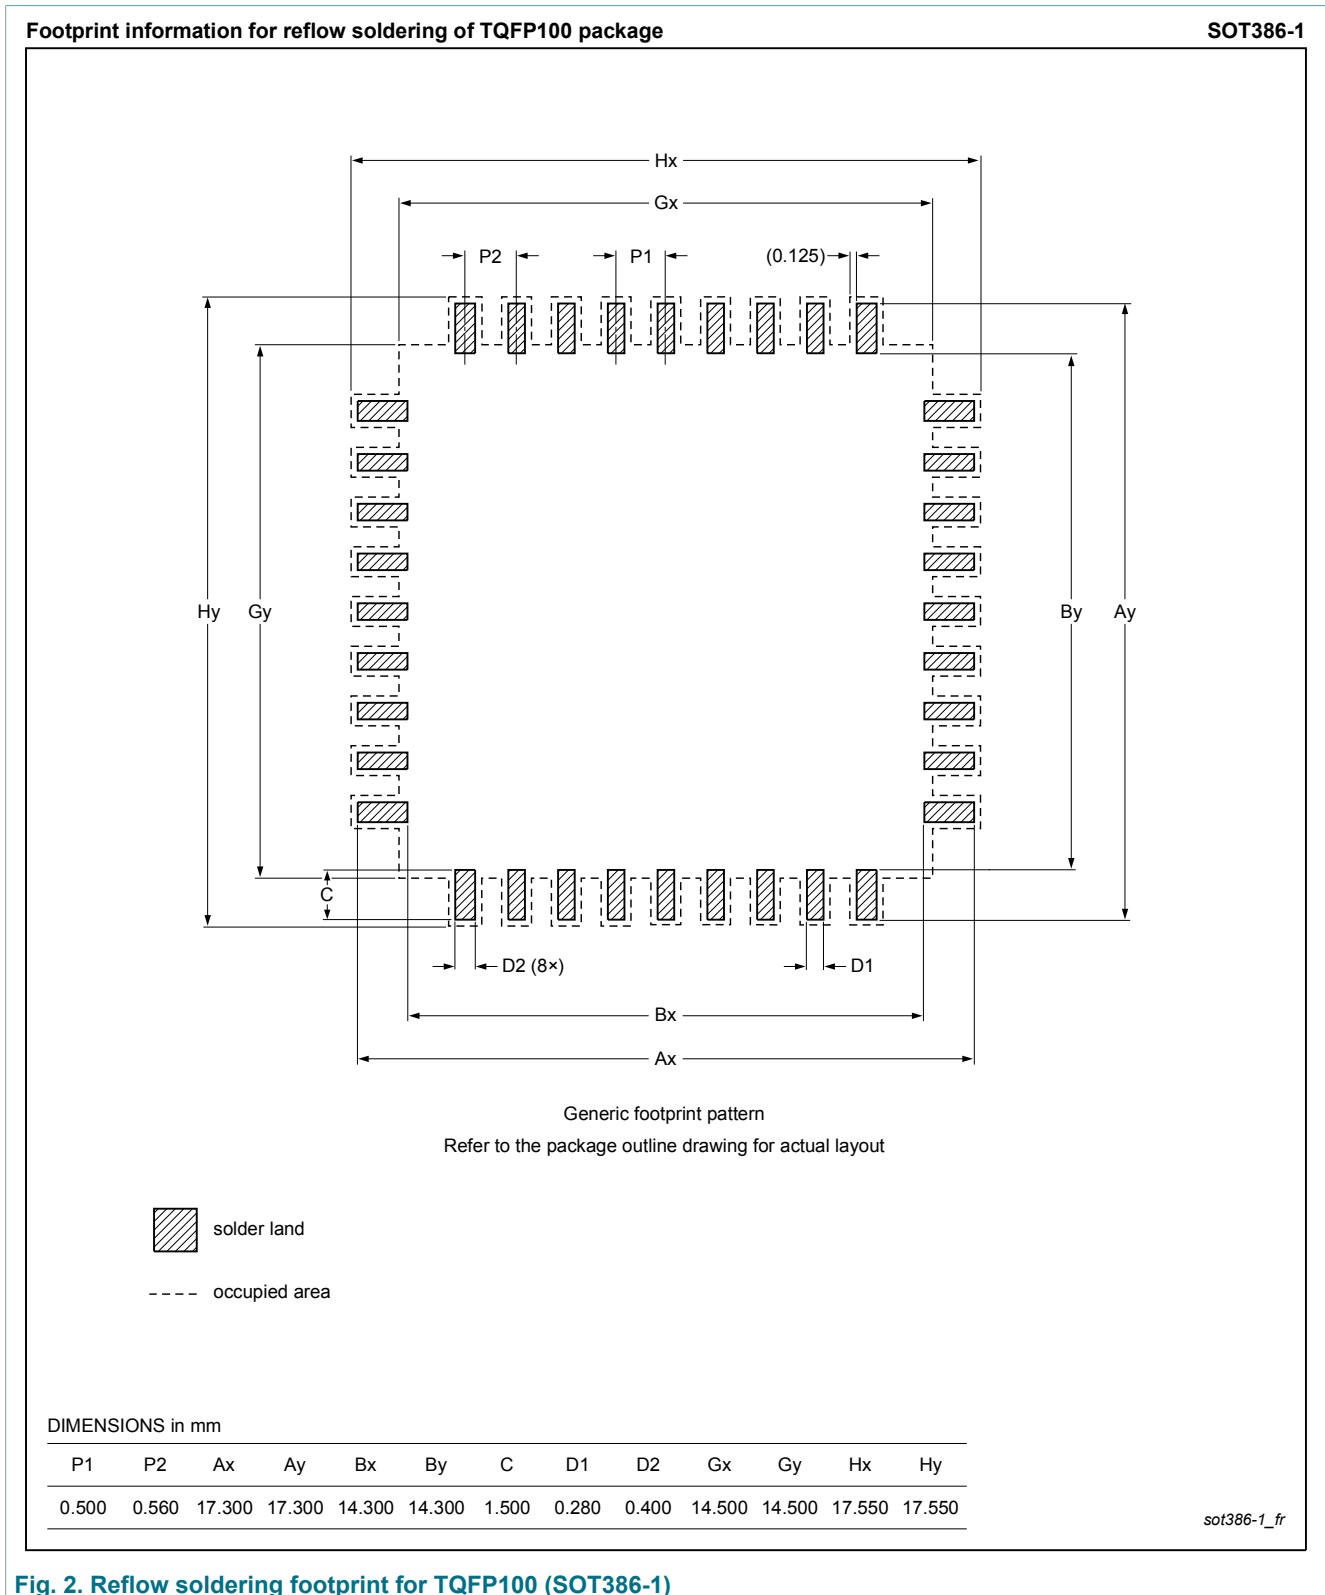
Reflow soldering footprint for TQFP100 (SOT386-1)
